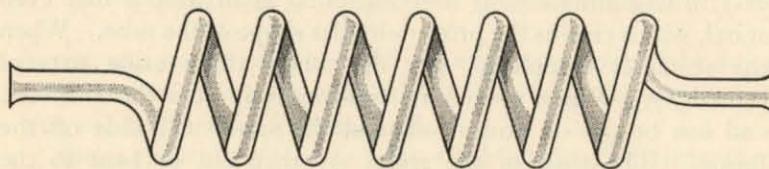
THE ENDS OF THE SPIRAL SHOWN READY FOR SEALING
